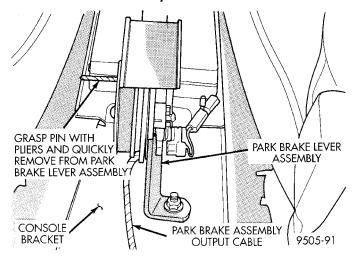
Removing Lockout Pin From Park Brake Lever Assembly
